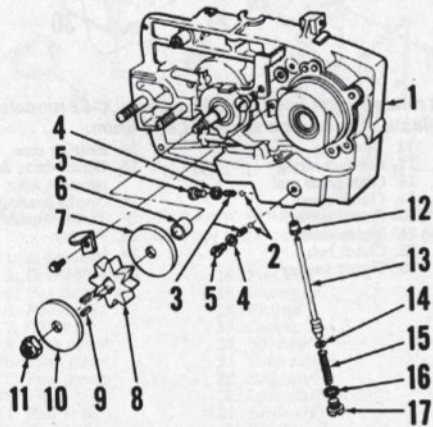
View showing chain drive sprocket and manual oiler pump components removed on models shown in Fig. HL64.
